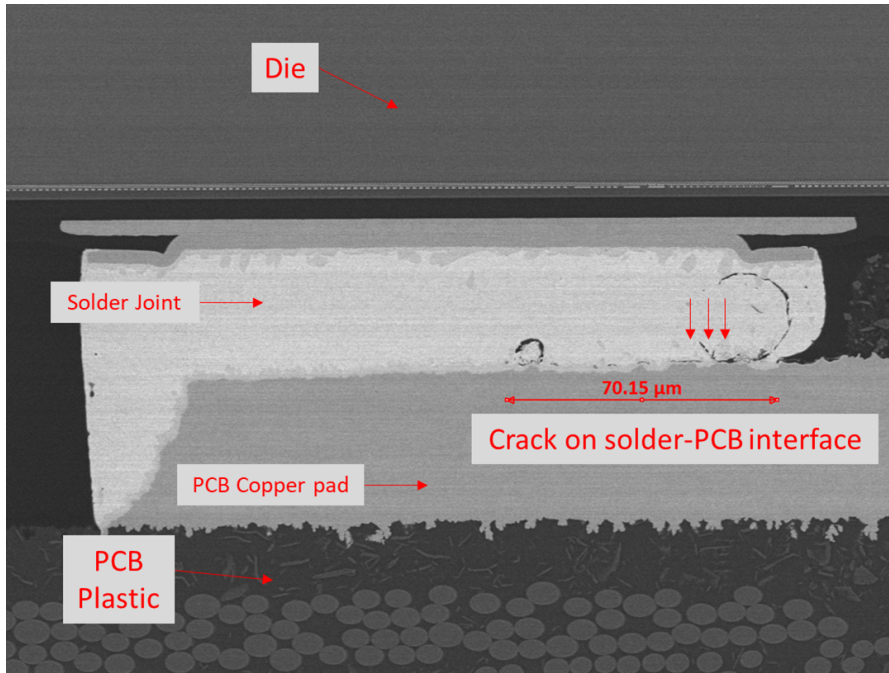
Cross-section image of solder joint crack after 20 hours vibration
